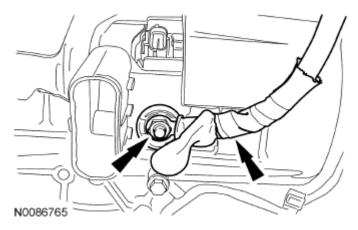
Locating Nut And Generator Wiring Harness Courtesy of FORD MOTOR CO.
